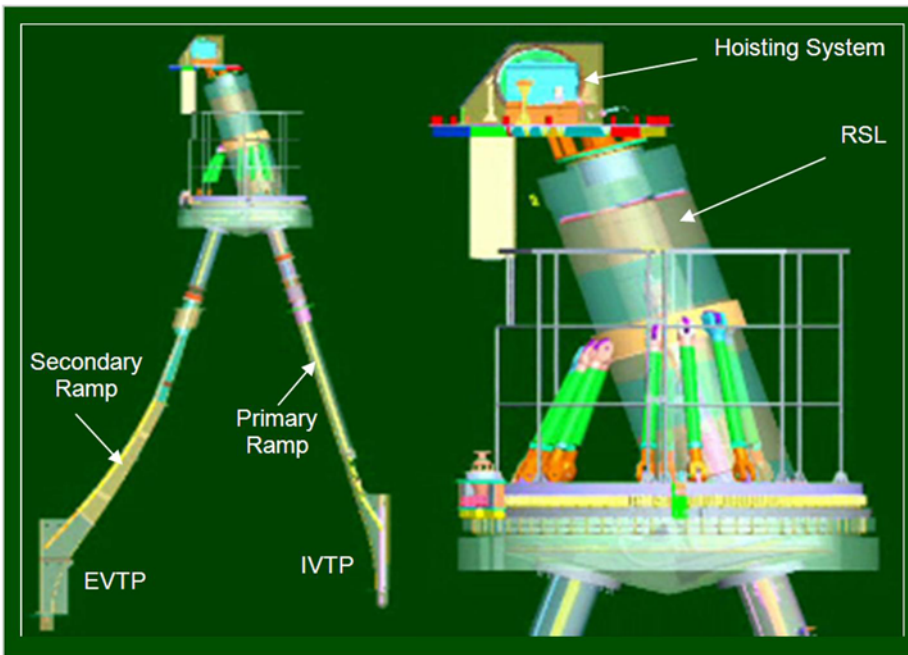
Inclined Fuel Transfer Machine for PFBR
